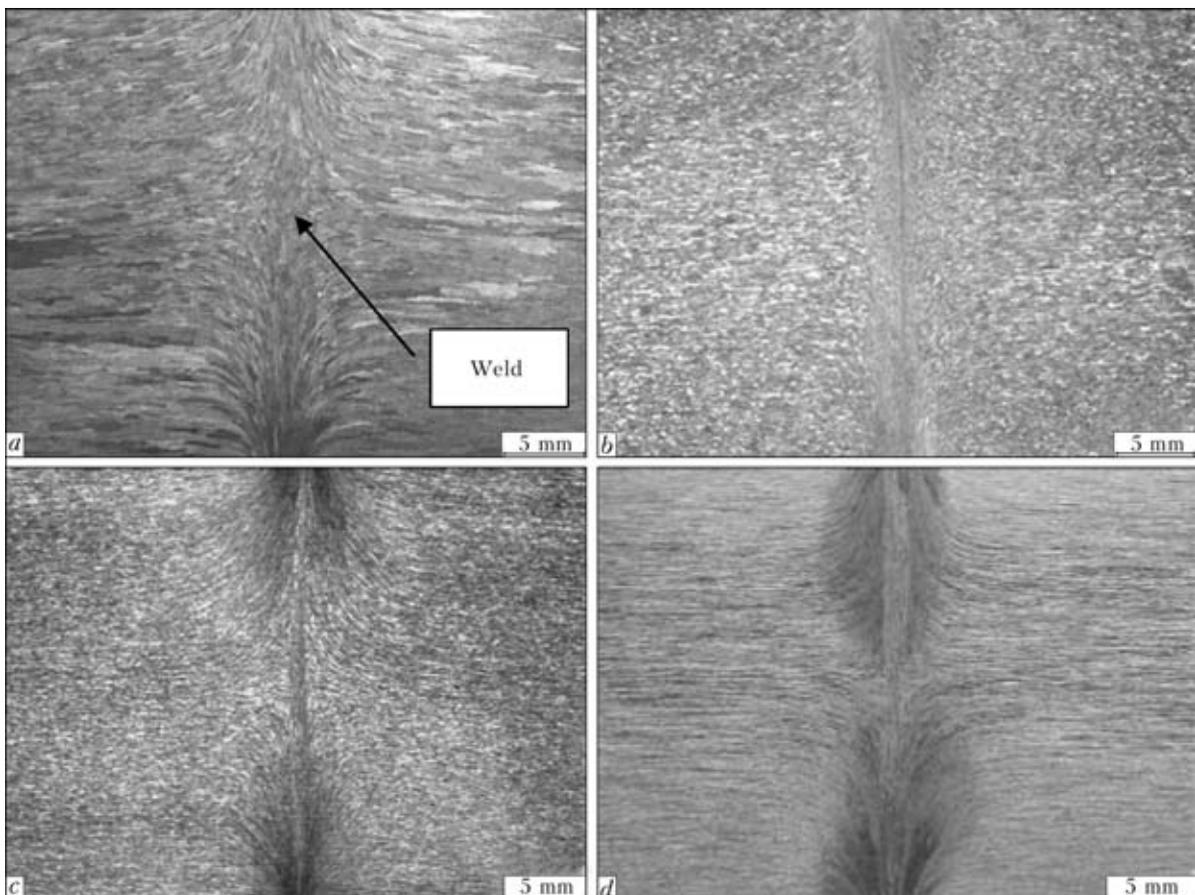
Macrostructures of welded joints of alloys 1201 (a), AD33 (b), 1570 (c) and V95 (d) made by FBW
